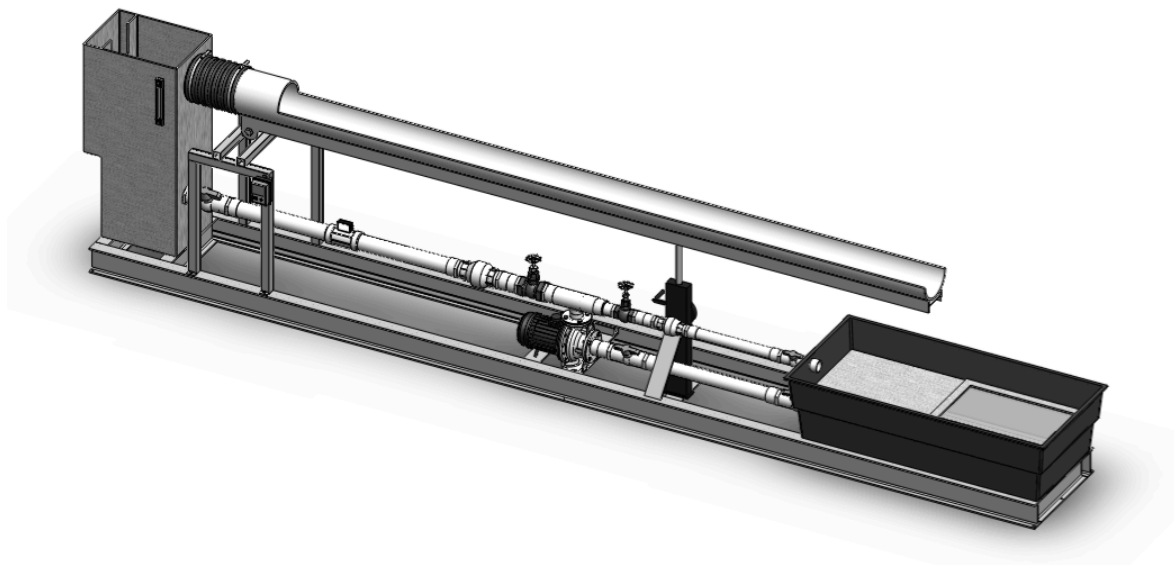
Final SolidWorks 3D model of the test rig. Detailed engineering drawings were produced from this model and supplied to the UWA Mechanical workshop technicians.
